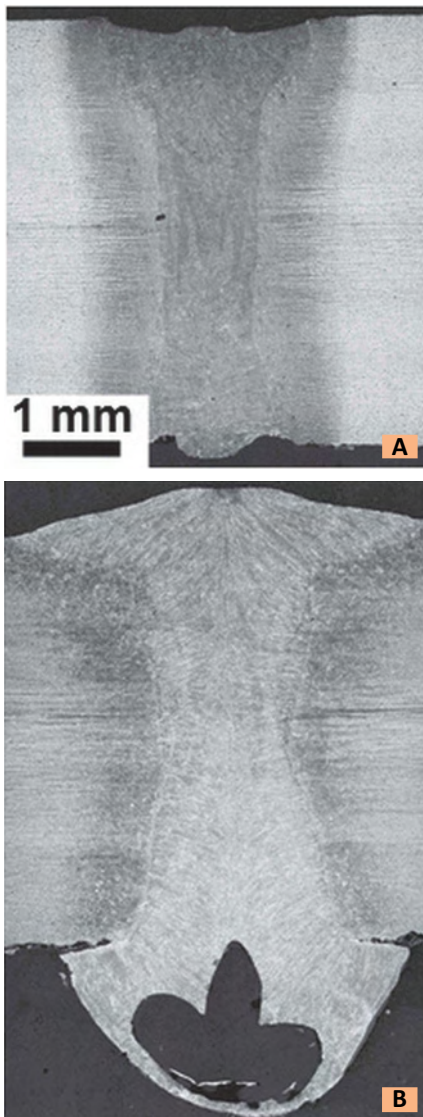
The transverse weld cross sections for: A — A laser weld (weld 1); B — a hybrid weld (weld 4) are shown. The laser conditions are the same, but the hybrid weld has increased heat input, larger amount of melted volume, and greater weight that must be supported by the surface tension force.
